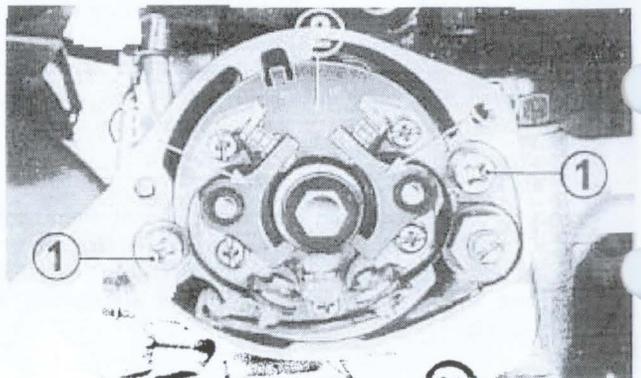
(1) Locking screw (3) Left hand breaker
